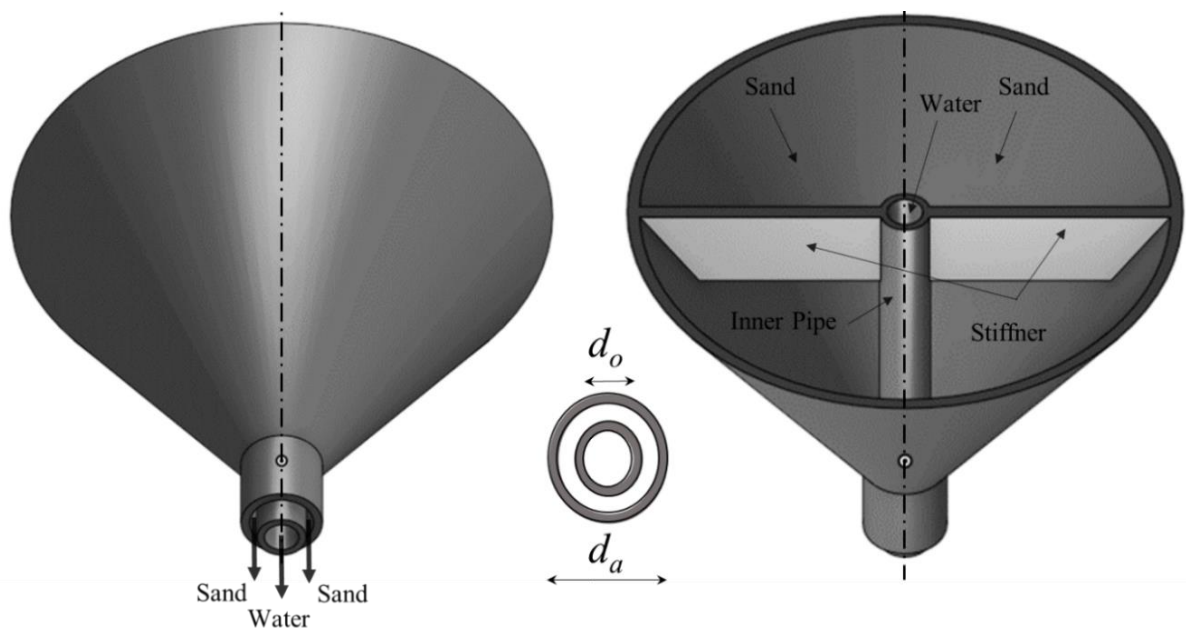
Details of the coaxial nozzle arrangement and funnel-pipe assembly.
